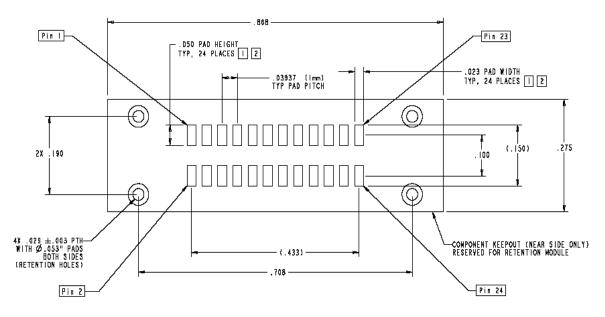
PCI Express[™] LAI footprint dimensions, pin numbering, and specification
